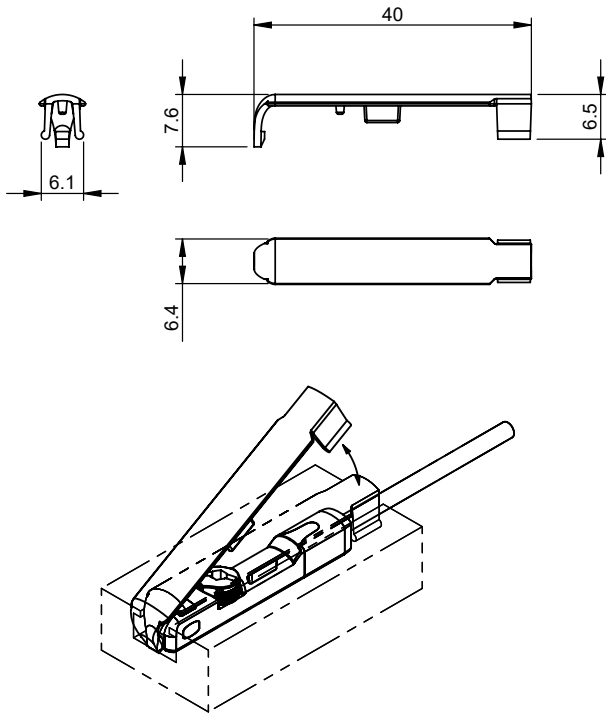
Weld splatter shield made of transparent PESU
